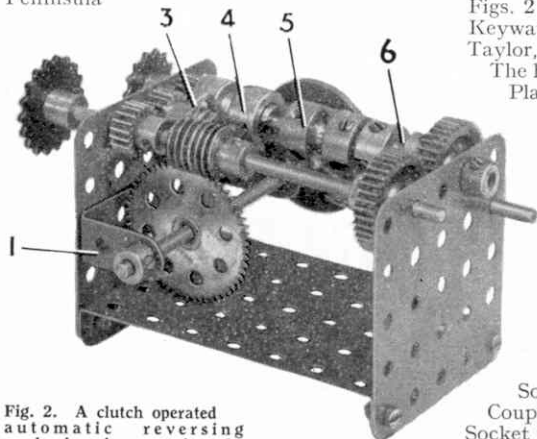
A clutch operated automatic reversing mechanism incorporating the Rod with Keyway. It was designed by H. H. Taylor, Huddersfield.
